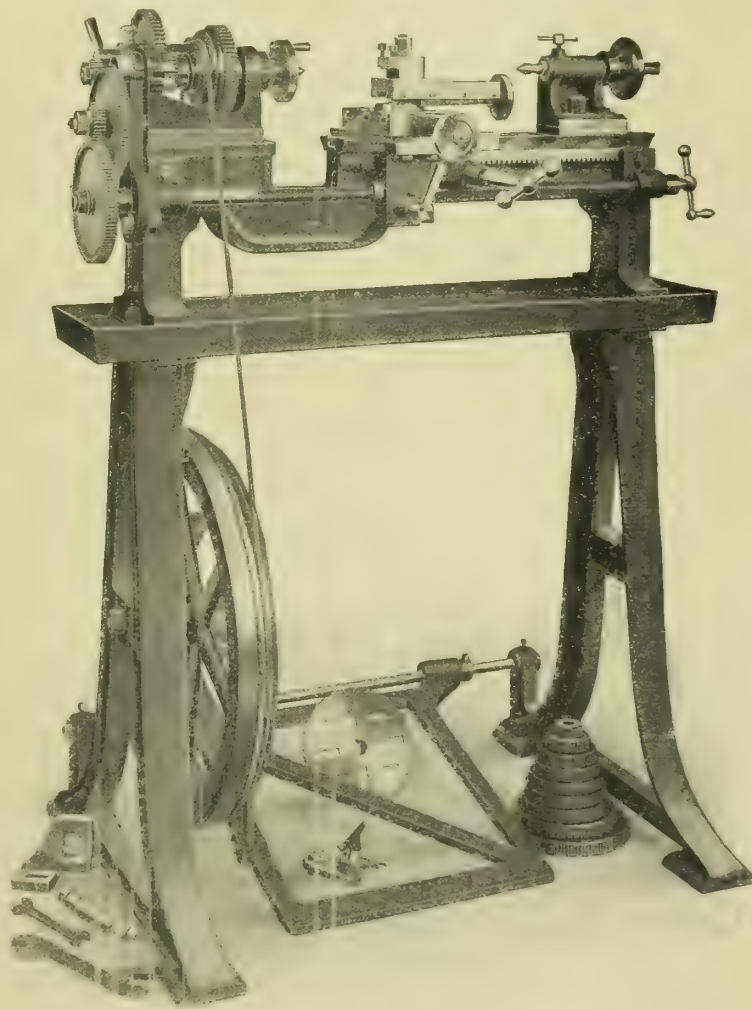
3½in. LATHE SHOWN BY MR. HENRY MILNES, BRADFORD.
